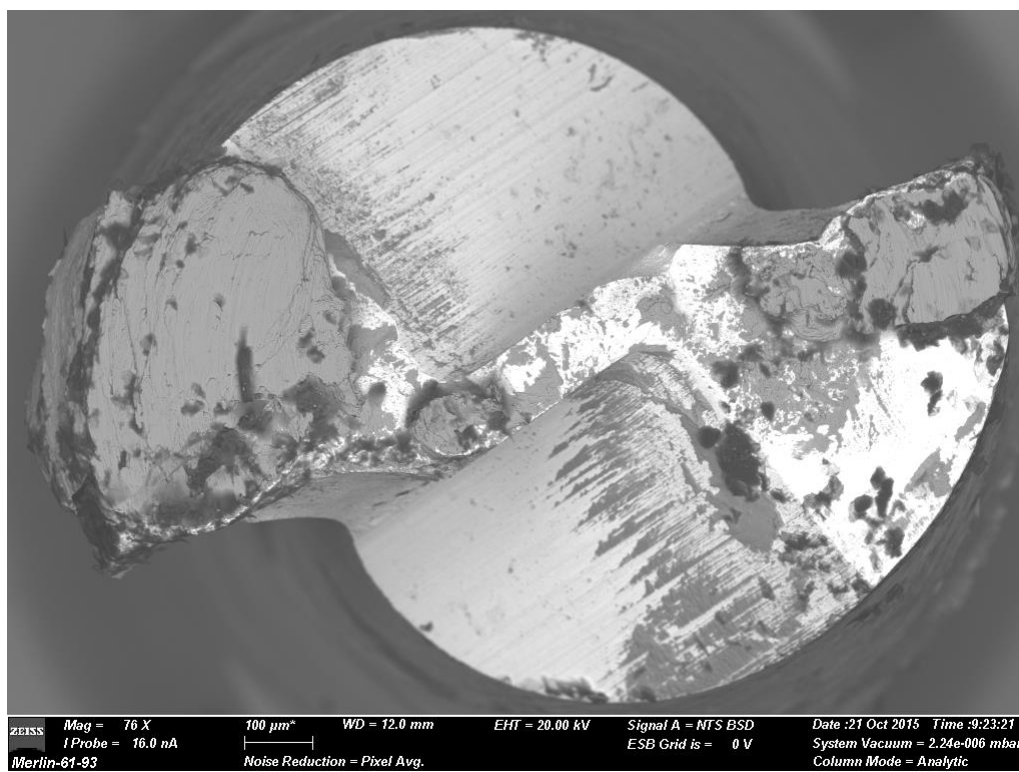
Experimental run 15: Tungsten carbide tool after machining with parameters $v_c = 75.4$ [m/min], $v_f = 768$ [mm/min] and $a_p = 125$ [μm]
